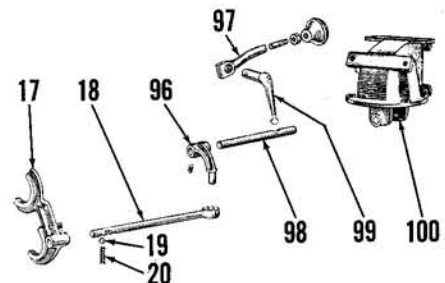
Exploded view of primary gearbox shift mechanism for single clutch models. Dual clutch shift mechanism is similar except for shift rail and fork; refer to Fig. 134 (items 23 and 24).
